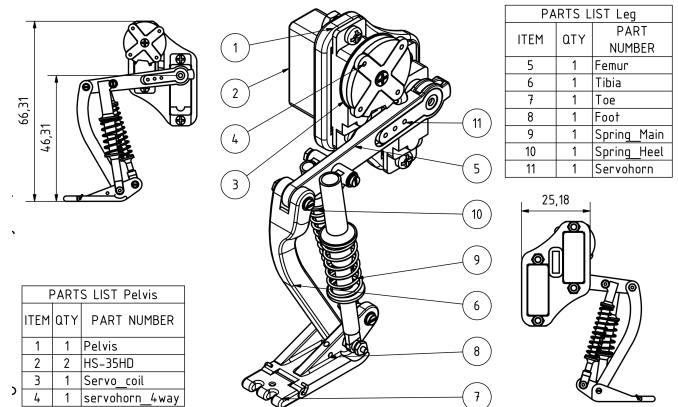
This technical drawing shows the hindleg including some dimensions and numbered parts. Created with Autodesk®Inventor®Professional 2017
